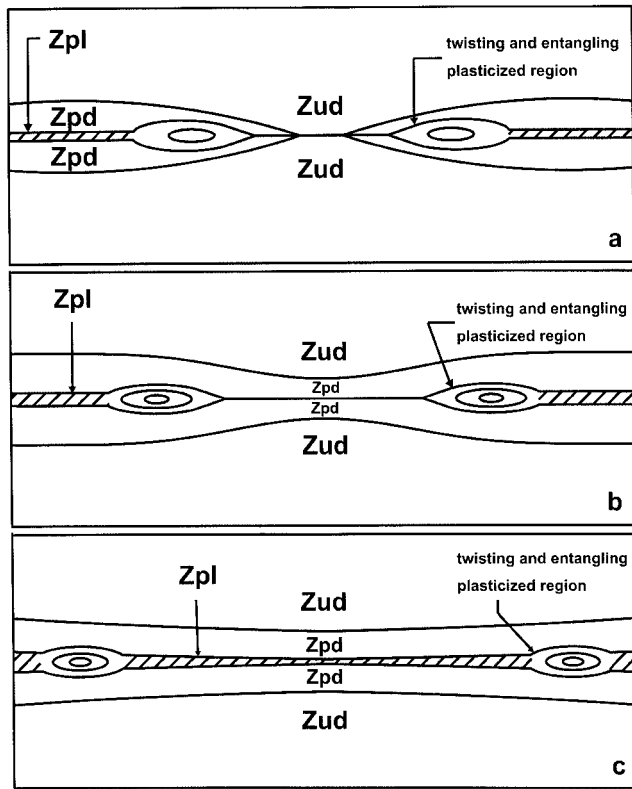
Schematic of heat-affected zone of welded PP with PP.
